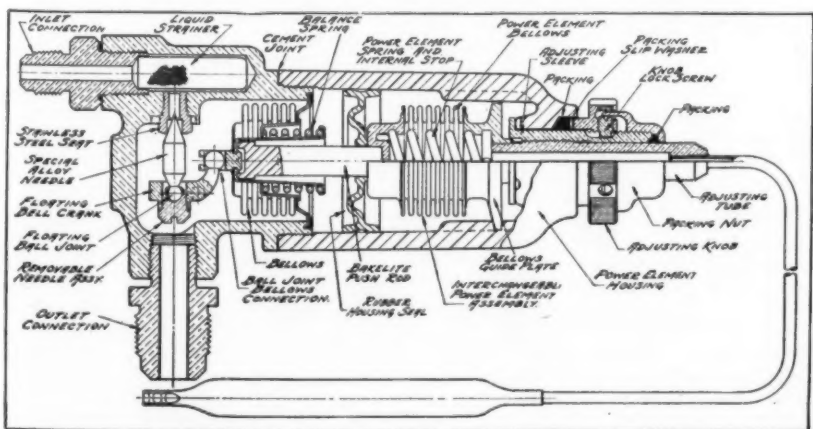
Section of the new Blue Ribbon thermostatic expansion valve. A new feature in valve construction is the flexible rubber housing seal.
